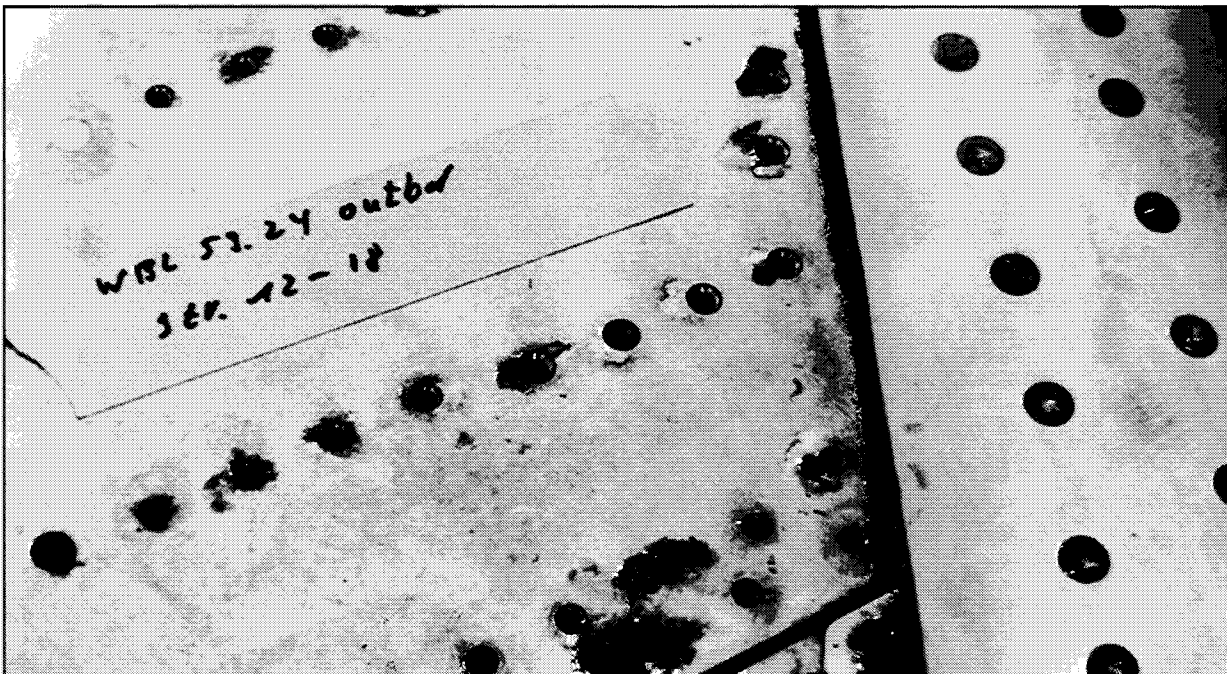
CORROSION DAMAGE AROUND FASTENER HOLES AND IN FASTENER HOLES
